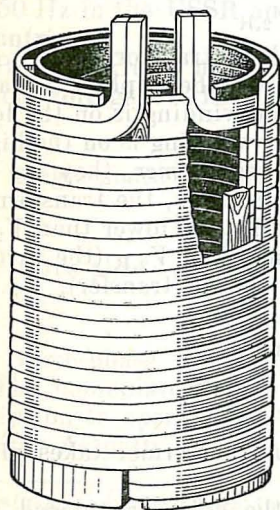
Two-layer cylindrical strip-conductor winding
